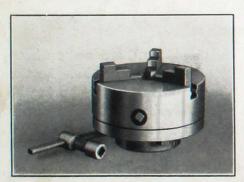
Four-inch—three-Jaw Geared Scroll Chuck.
